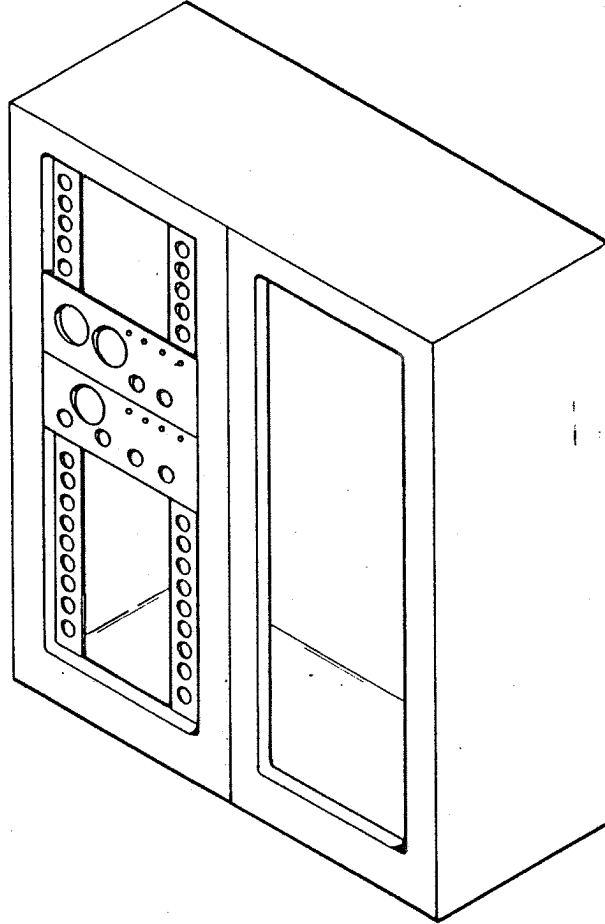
Instrument Rack (Cabinet would Contain Pages or Other Special Instruments instead of Simple Drawer Type Instruments)
